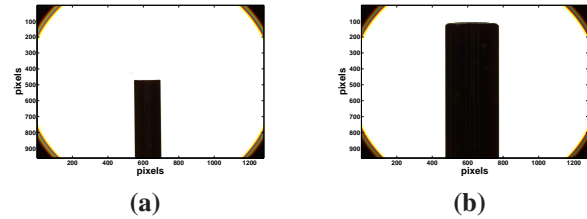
Plug gage image with dimension (a) 10 mm and (b) 20 mm.
